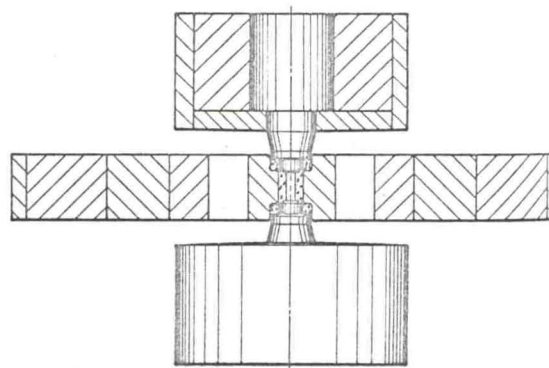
3/4-in. cylindrical supported piston pressure vessel.
